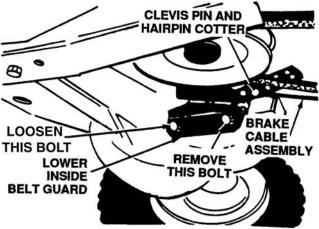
Disconnecting Brake Cable and Removing Hex Bolt
